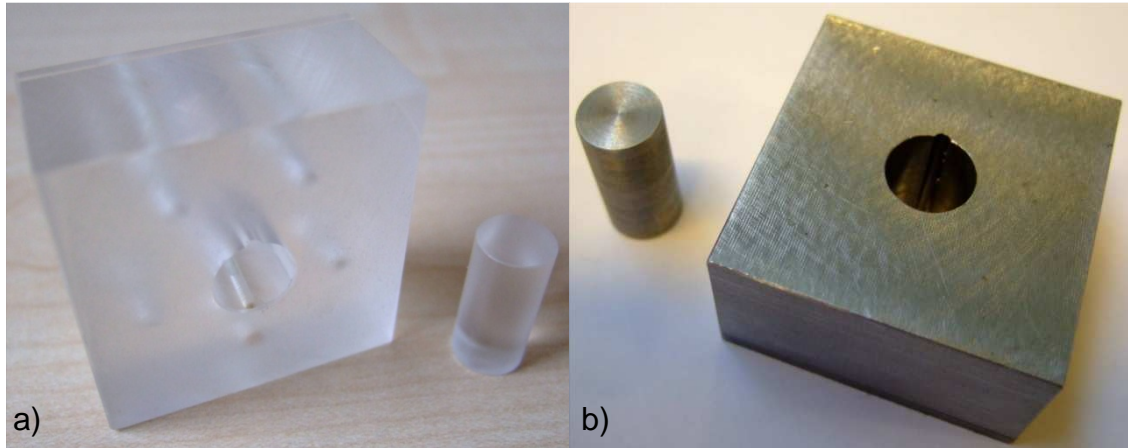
Jig with plunger a) made of PMMA and b) made of steel
